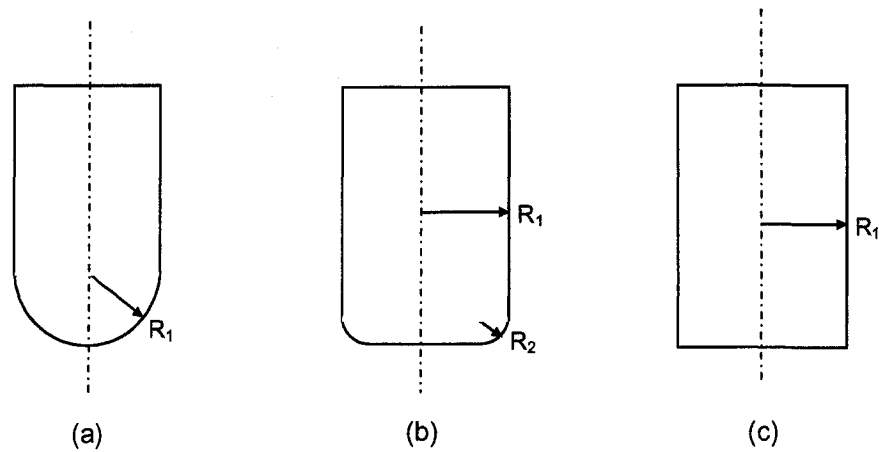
Three types of common milling cutters. (a) Ball end-mill; (b) torus end-mill; (c) flat end-mill.
